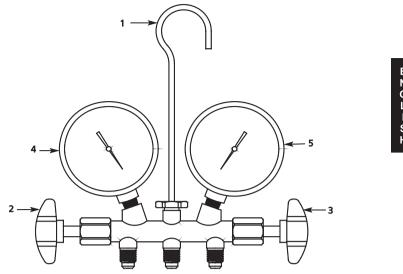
Repair Parts Illustration for Manifold Gauge Sets
